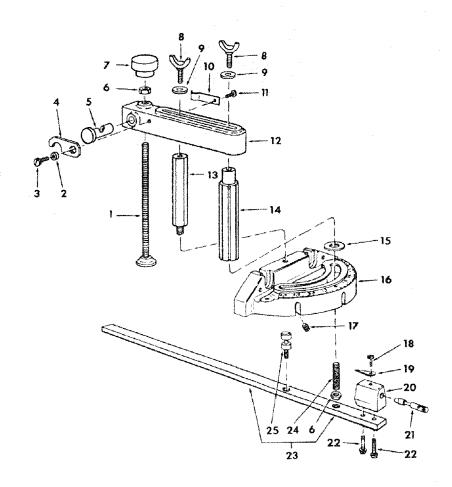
MITER GAUGE/HOLD DOWN ASSEMBLY 62776
